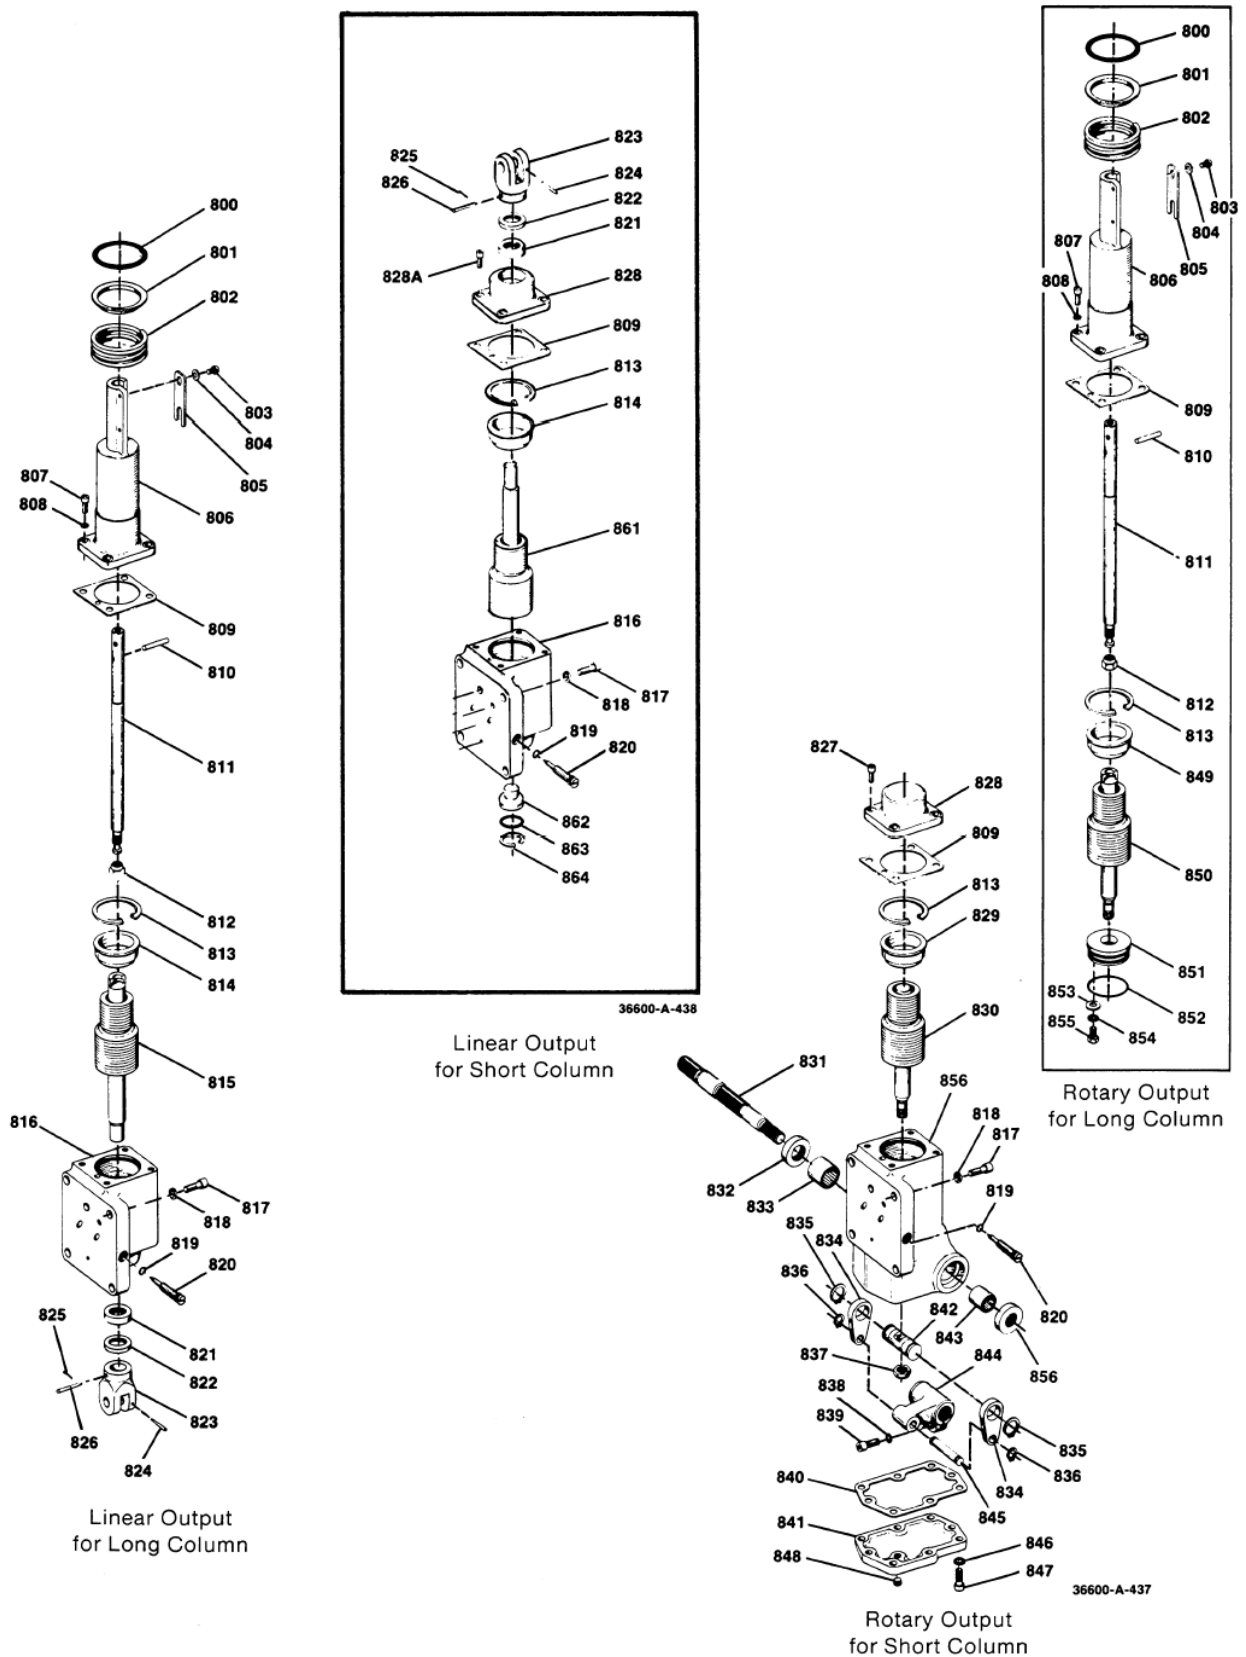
Exploded View of 12 ft-lb (16 J) Differential Power Cylinders
